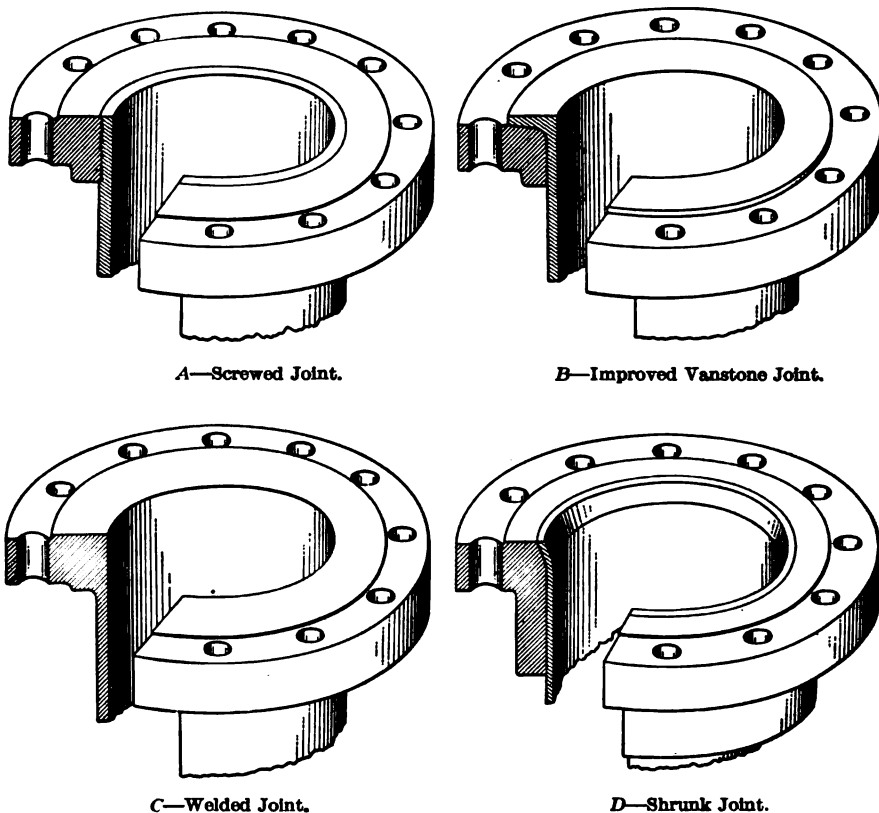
METHODS OF CONNECTING FLANGES TO WROUGHT PIPE.
